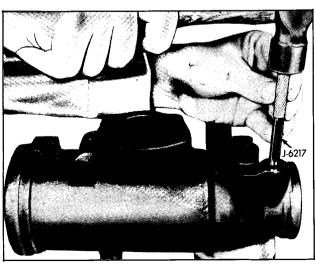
Installing New Connector in Housing Using Tool J 6217
